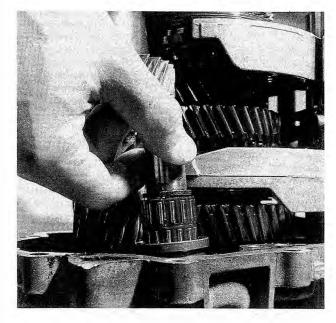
Reverse gear shaft being withdrawn from transmission case.
